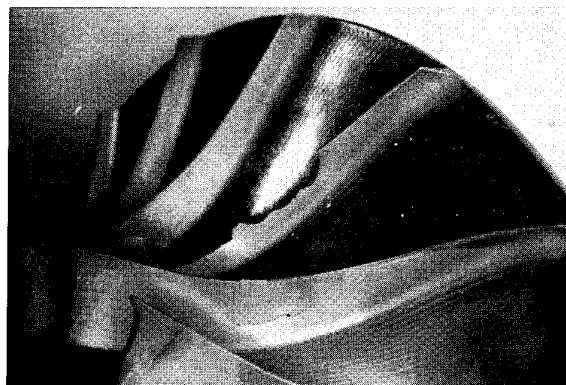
Gem Impeller following AC Coarse Dust Ingestion
